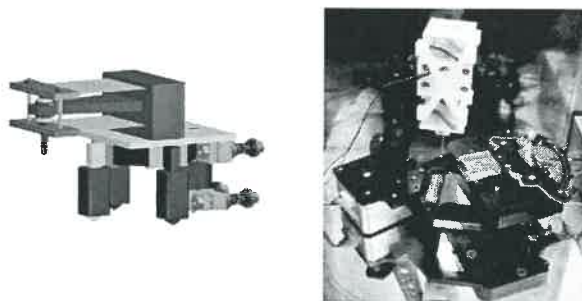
Nano mold attached to the voice coil motor driven leaf spring head on micro robot
